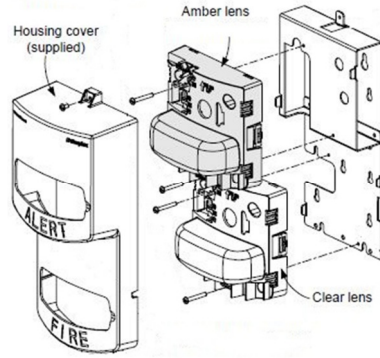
Tyco product 4906-0009, exploded view (Products, 2010)
